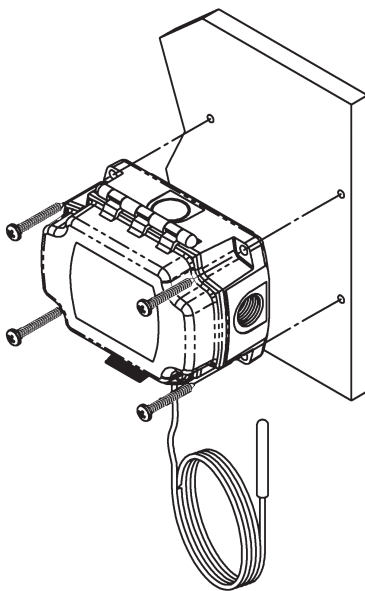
Mounting the BAPI-Box (BB) Enclosure
